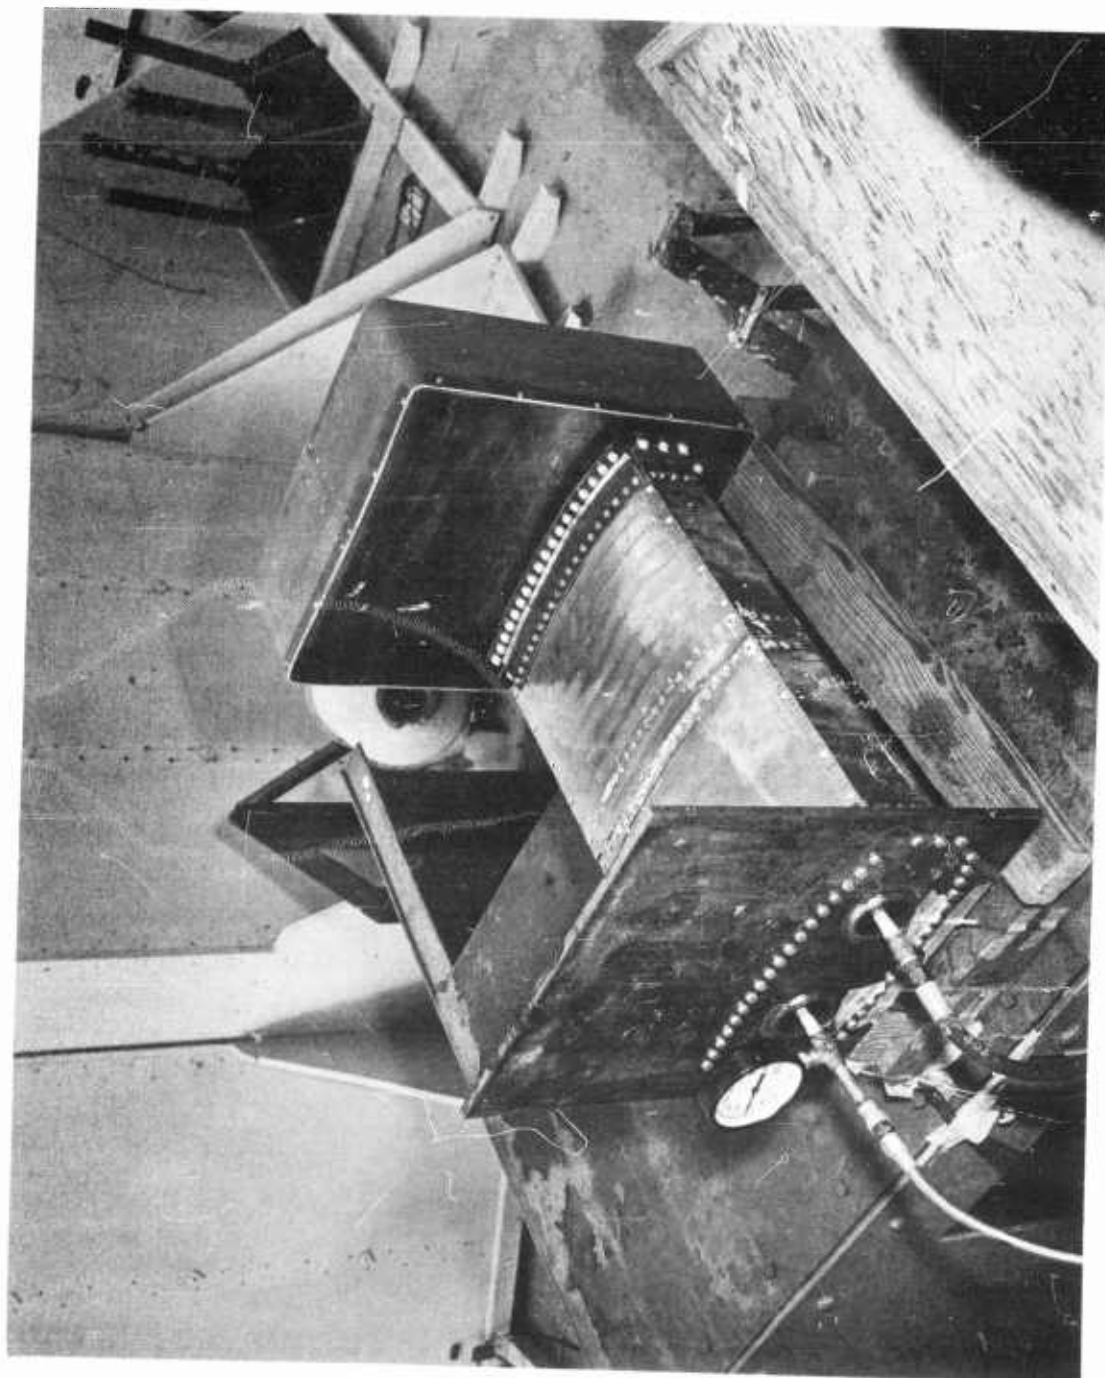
Test Setup -- Two Segment Duct Assembly
